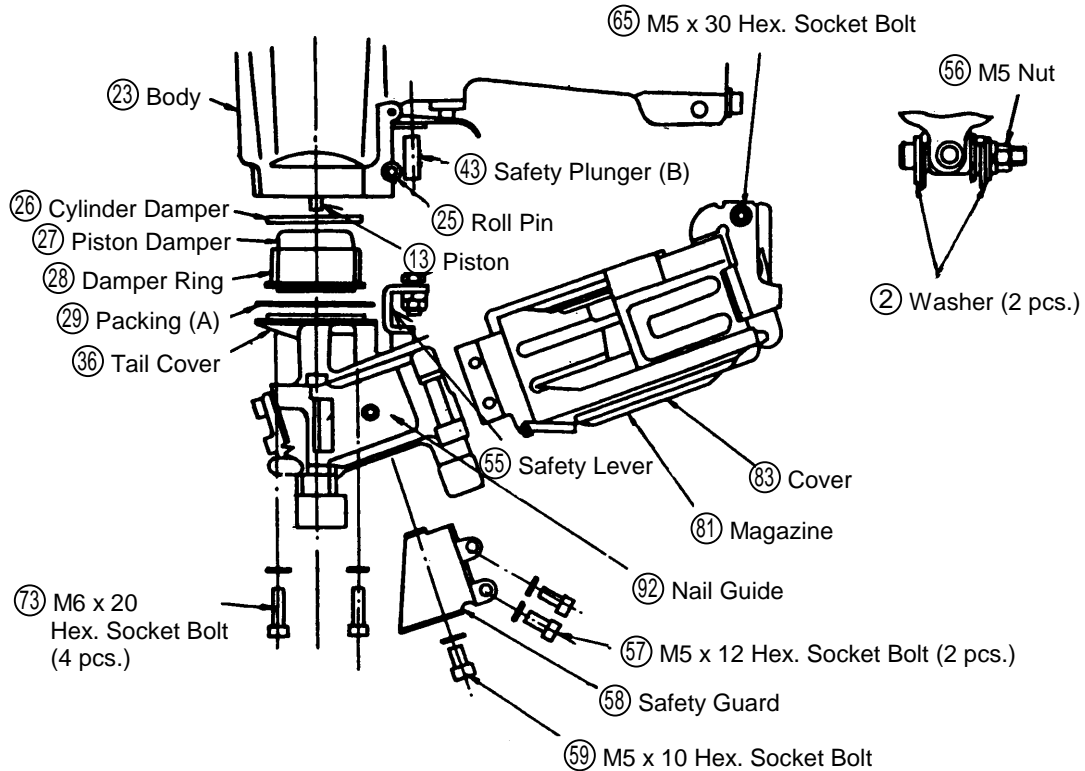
Piston damper, Packing (A)-disassembly/reassembly
